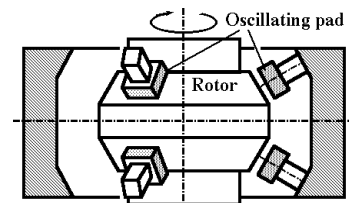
Arrangement diagram of rotor and six oscillating pads
